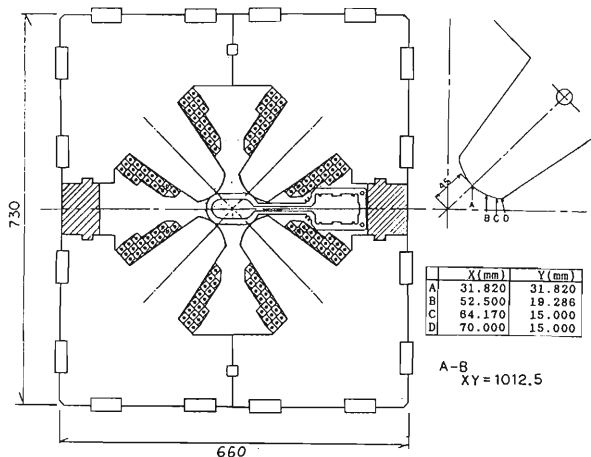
Cross-sectional view of a prototype quadrupole magnets. The top and bottom halves are jointed through a non magnetic material to keep a space for inserting of a vacuum chamber. Field calculations were carried out on two types of yoke structures with and without a magnetic circuit in the yoke at median plane. The field gradient was found to be the same in both types.
